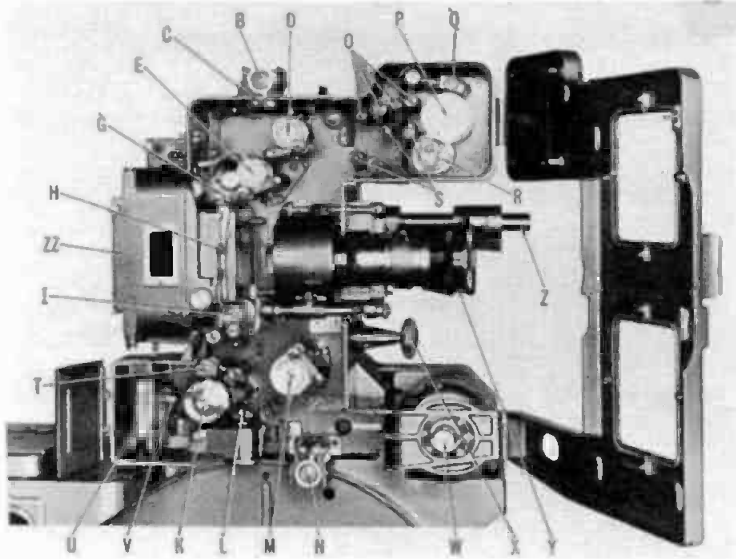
B. Interior view of Cinemeccania Victoria-8 35/70-mm projector showing the penthouse, picture head, and optical film sound head. (Courtesy, Corbons, Inc.)
